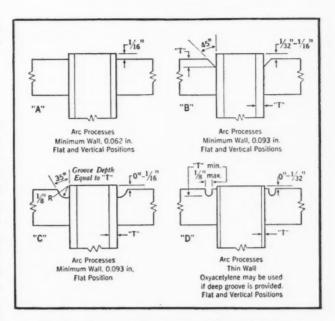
Suggested joints for welding tubes into tubesheets. Joints (B) and (D) are preferred for vertical welding. Tubes should be lightly rolled both before and after welding, and tube ends should be reamed and beveled after welding
